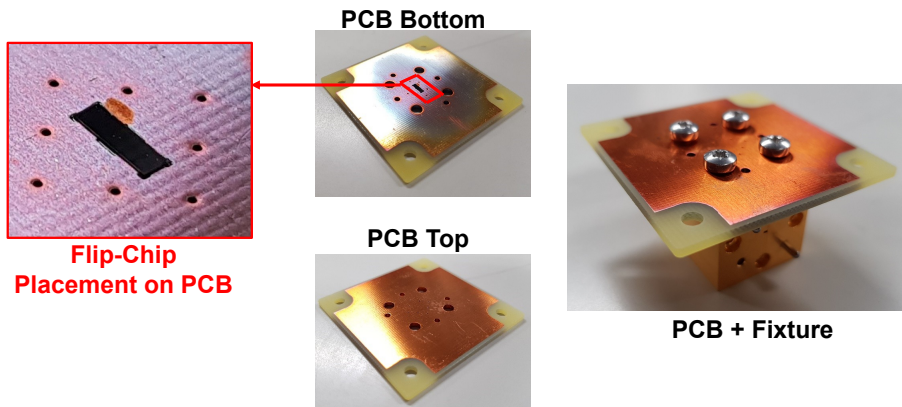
Details of the chip implementation on the FR4 PCB and integration with the WR-3 fixture.
